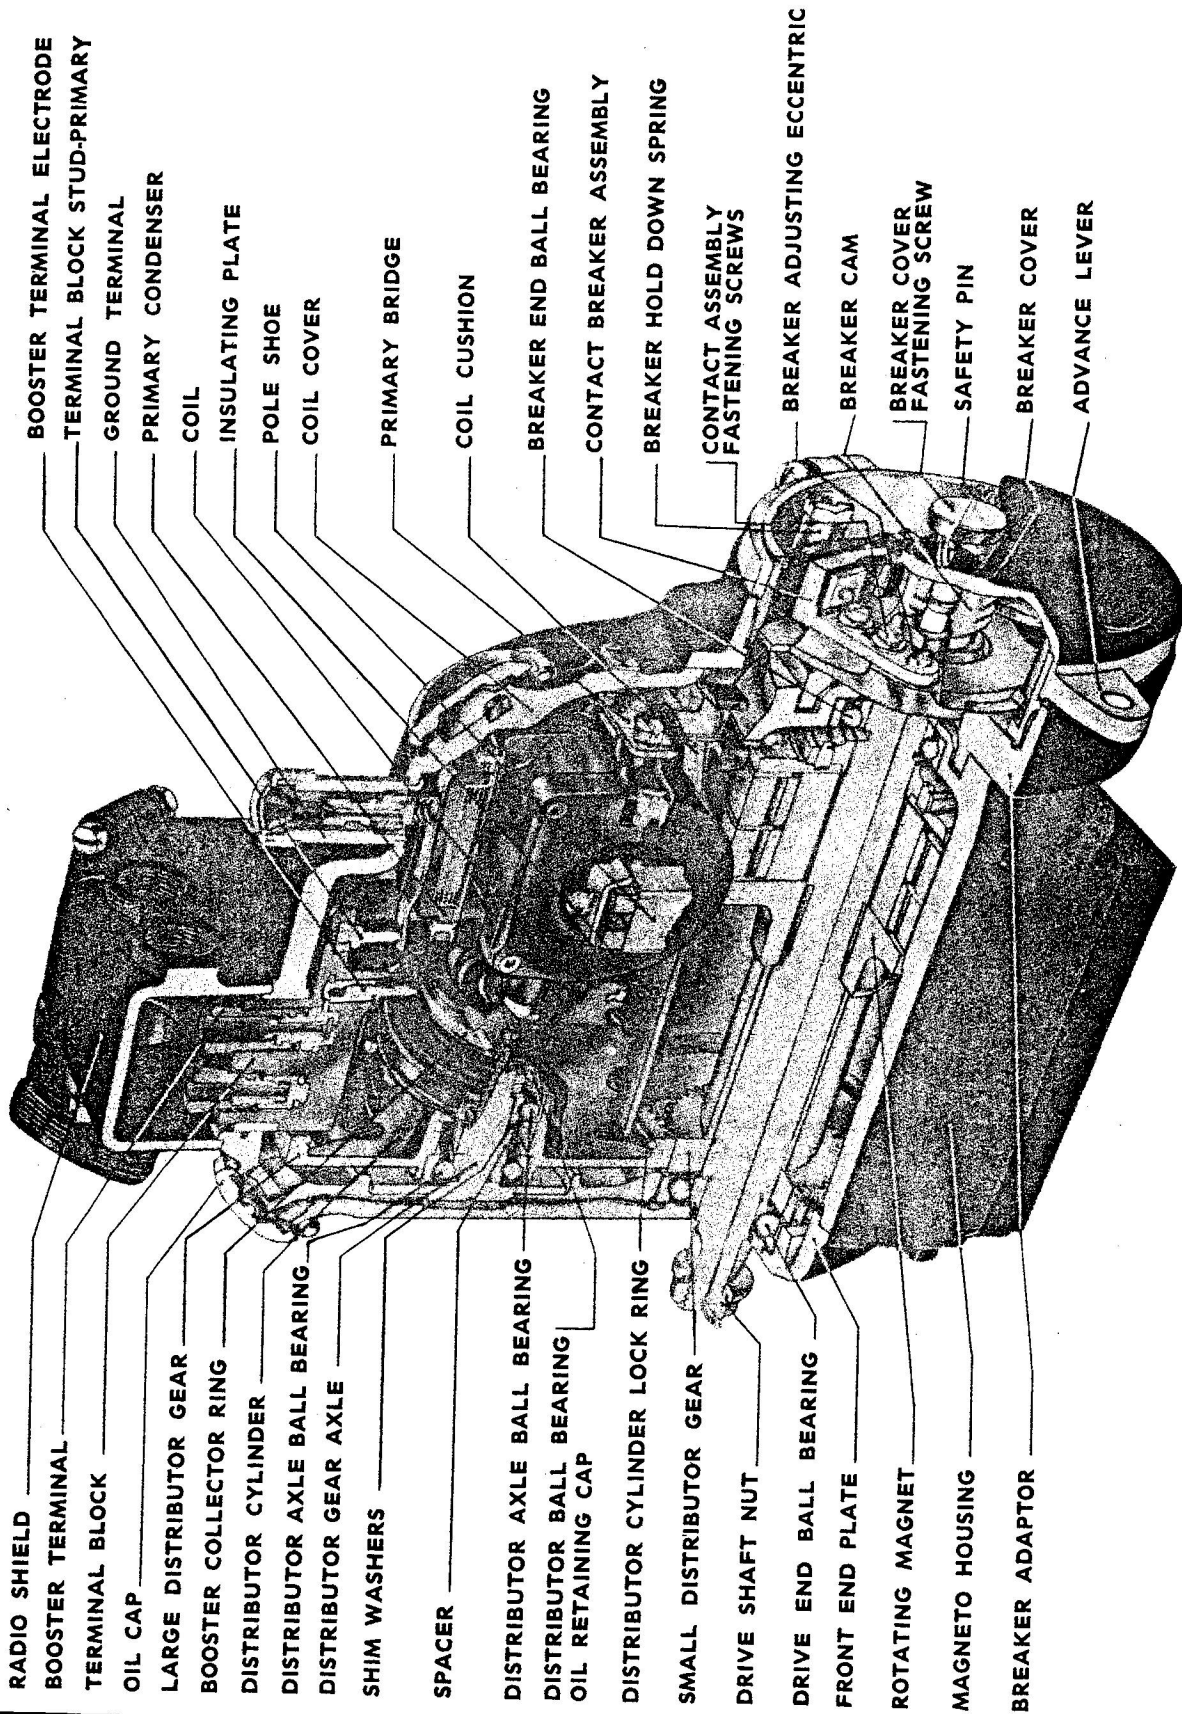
Three Quarter Cutaway View of the SB99RN Magneto
